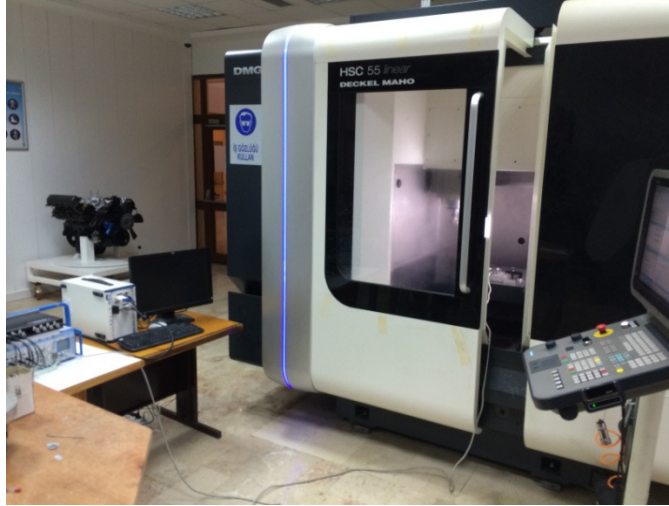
DMG HSC 55 milling machine, used for micro milling tests.
